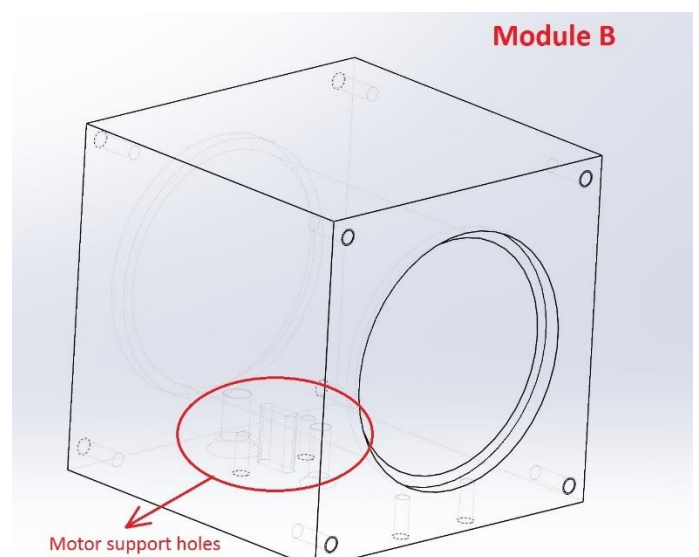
Module B 3D design and details regarding the attacks of the motor support and the wind tunnel support
